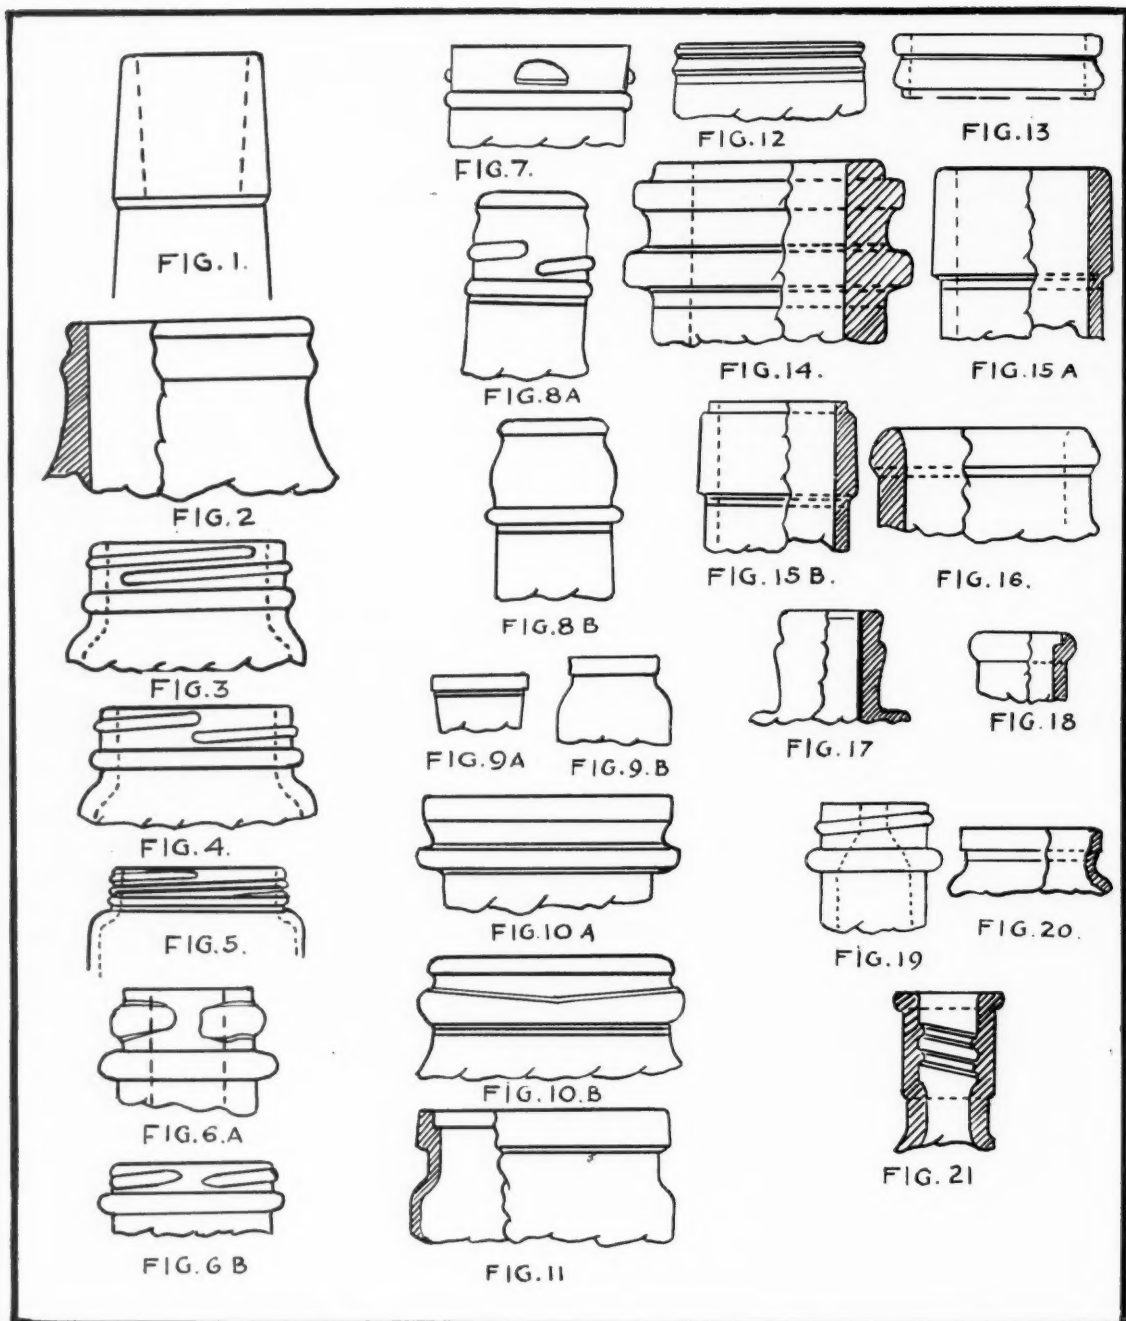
Bottle with stopper finish; sealing surface inner surface of neck opening. Fig. 2. Crown finish; liner secured against top sealing surface. Figs. 3 and 4. Continuous thread (C T) finishes, shallow and deep; thread just below top engages closure. Fig. 5. R. O. (roll on) finish; modification of continuous thread. Figs. 6A and 6B. 2-lug Amerseal and 4-lug reseal finishes; also modifications of C T threads. Fig. 7. 4-lobe Duplex seal finish. Figs. 8A and 8B. Hermetic screw and friction finishes. Figs. 9A
